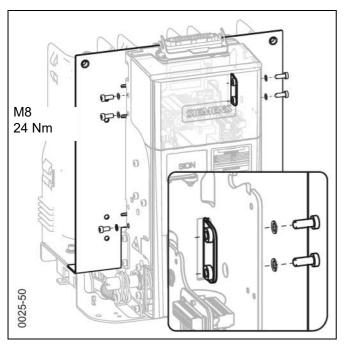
Mount a continuous protective plate between the pole and operating mechanism housing (optional)
